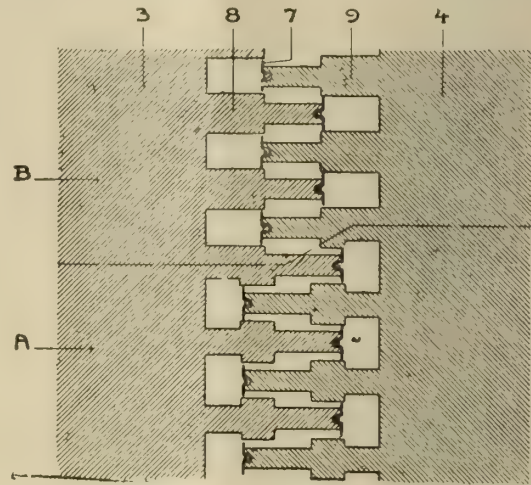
DETAILS OF LABYRINTH DUMMY PACKING.
